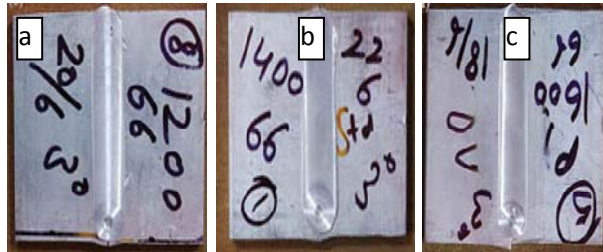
Macrograph of Welded Work Pieces at Tool Rotation Speed of (a) 1200 rpm & 66 mm/min (b) 1400 rpm & 66 mm/min (c) 1600 rpm & 66 mm/min
